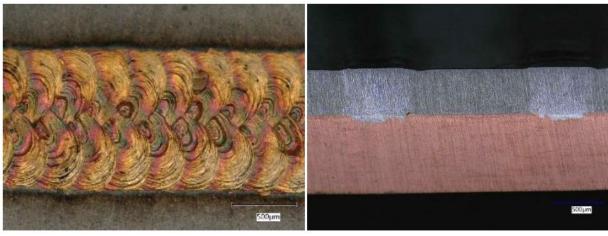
Busbar welding Copper (Cu) to Aluminum (Al)
